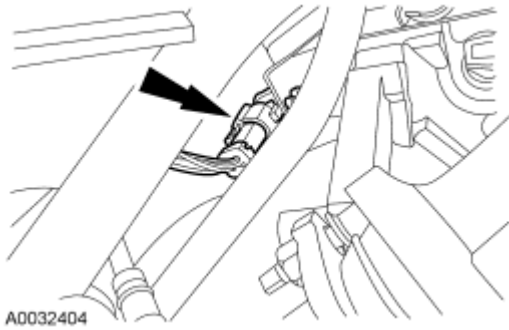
Locating Generator Wiring Pin-Type Retainer
